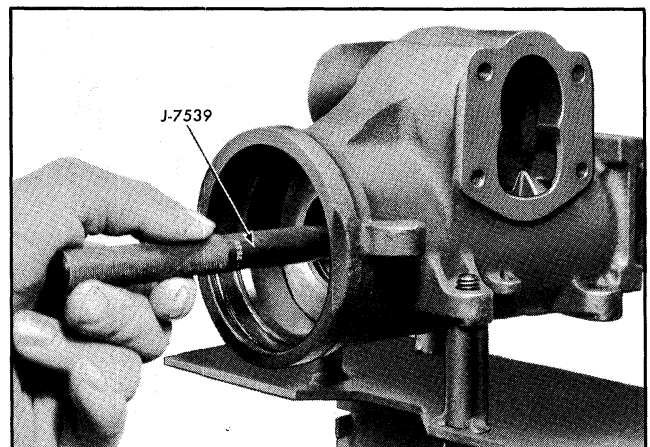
A-9 Arbor J-7539 Against End of Steering Worm
